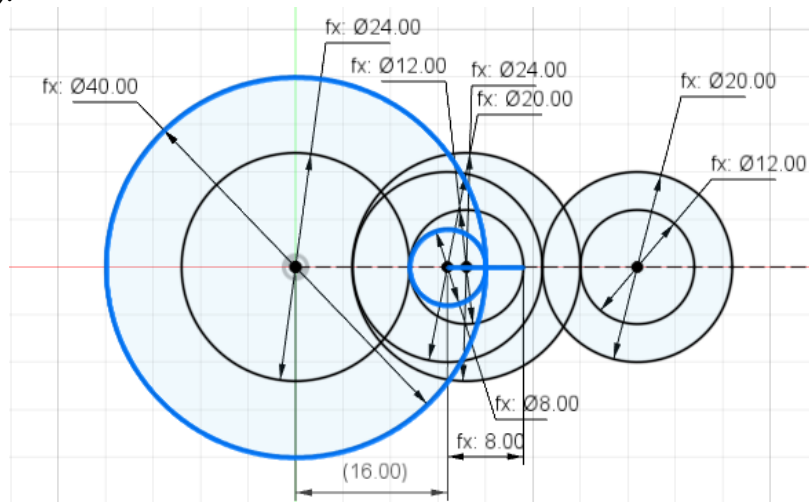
Gear-Train Mechanism (Autodesk Fusion 360 CAD Drawing)
